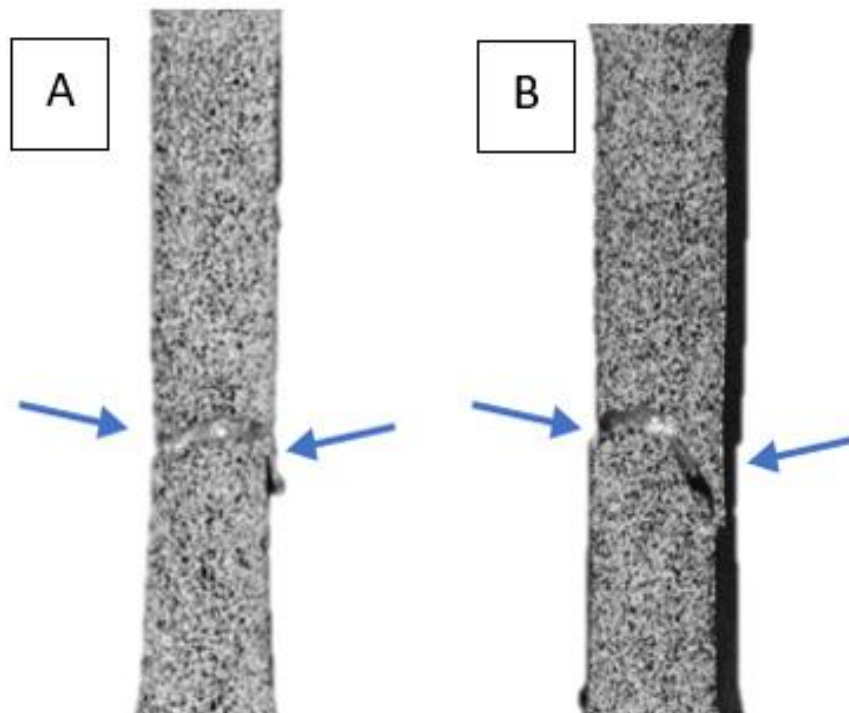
Fracture of the Mg AZ31 tubes A) FSBE processed tube B) base material tube.
